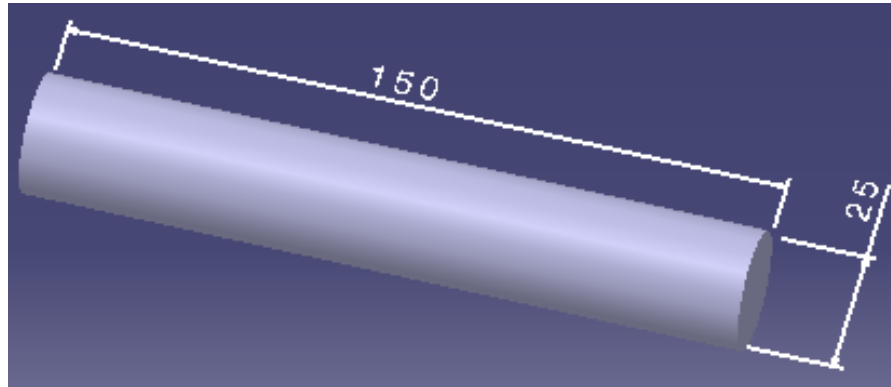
3D CATIA V5 drawing of cast specimen dimension in Millimeter (mm)
